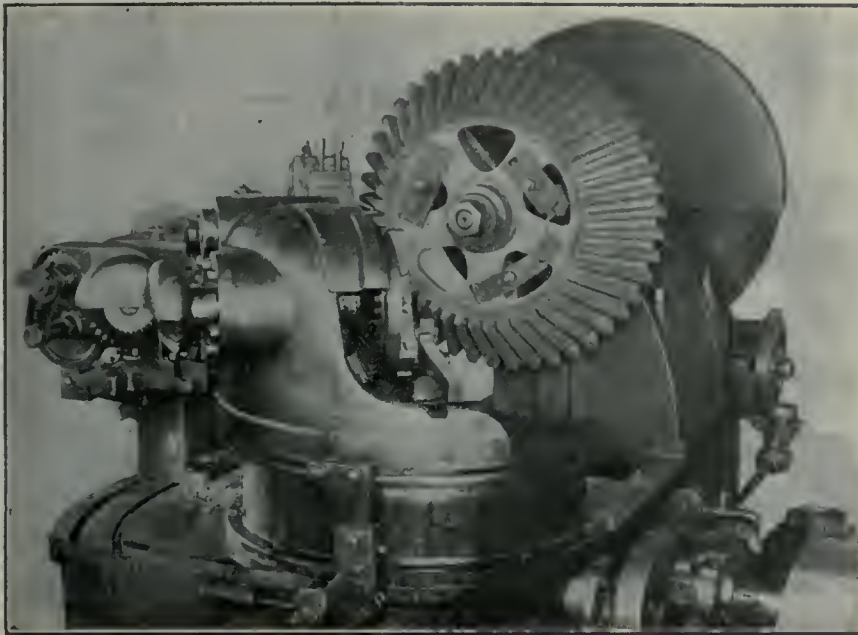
LARGE BEVEL GEAR ON 60-INCH GLEASON PLANER.
